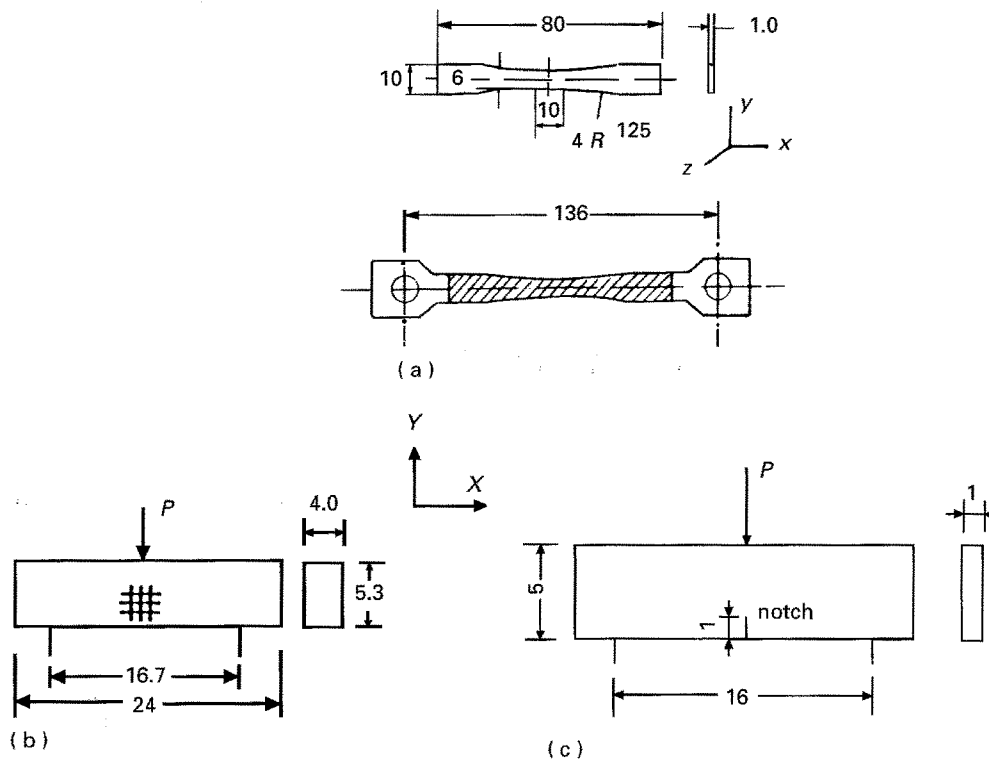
The sizes and loading conditions of (a) the tensile specimen, (b) the three-point bending beam, and (c) the beam with a single-edge notch for Ce-TZP. Dimensions in millimetres.
